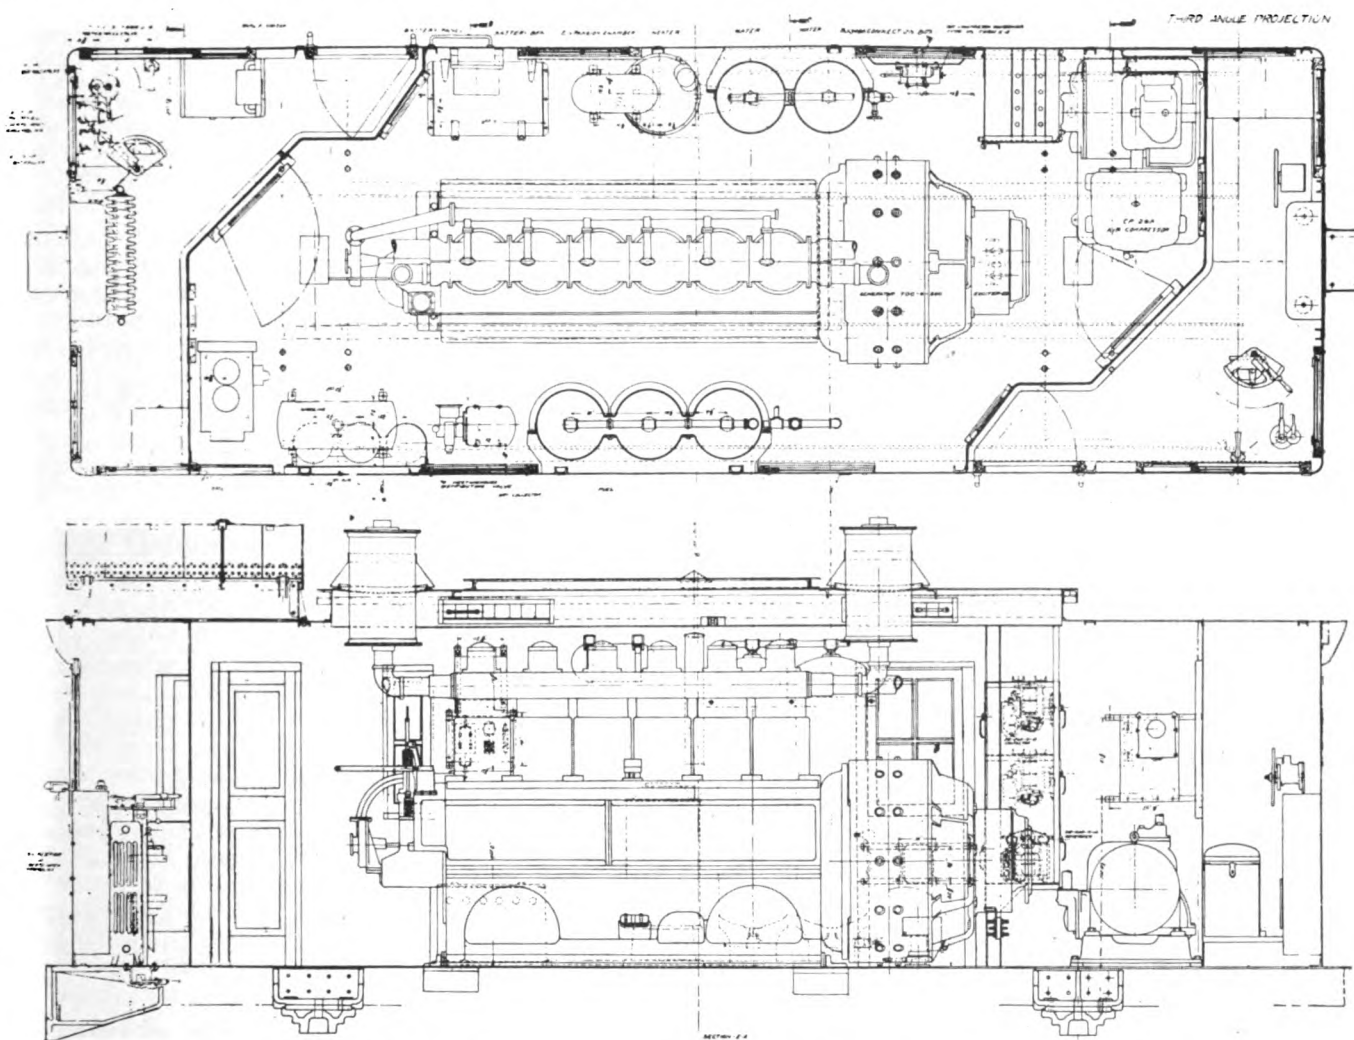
Two drawings of the oil-electric locomotive. Upper showing plan view; lower view, elevation.
